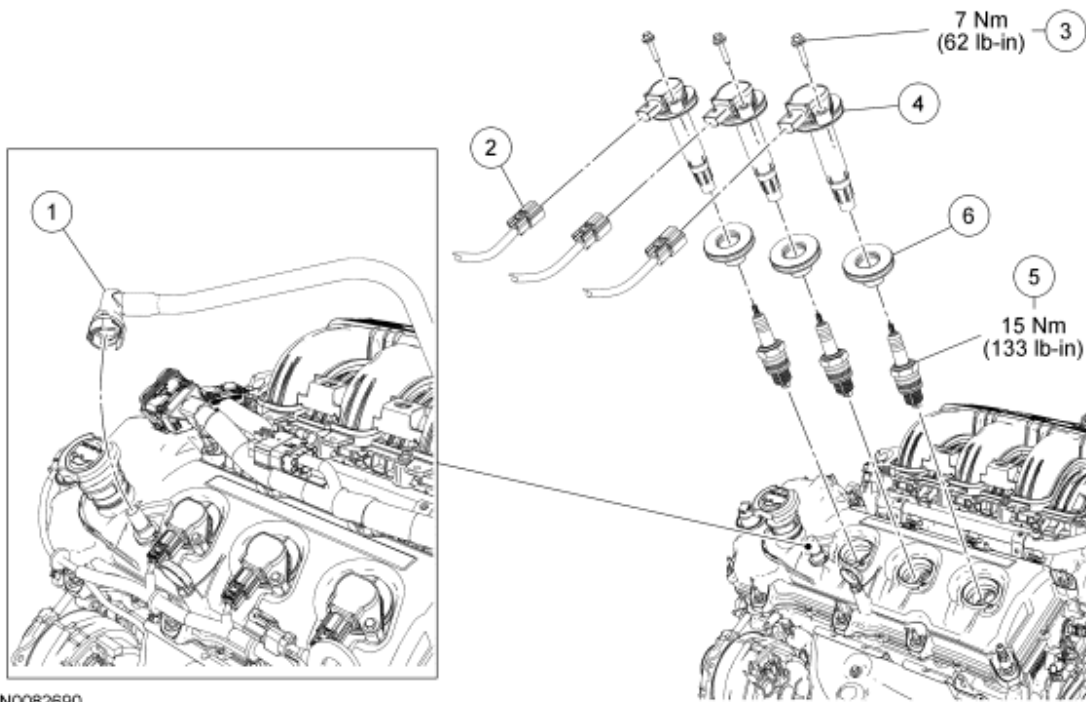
Identifying LH Side Engine Ignition Components (With Torque Specifications)
